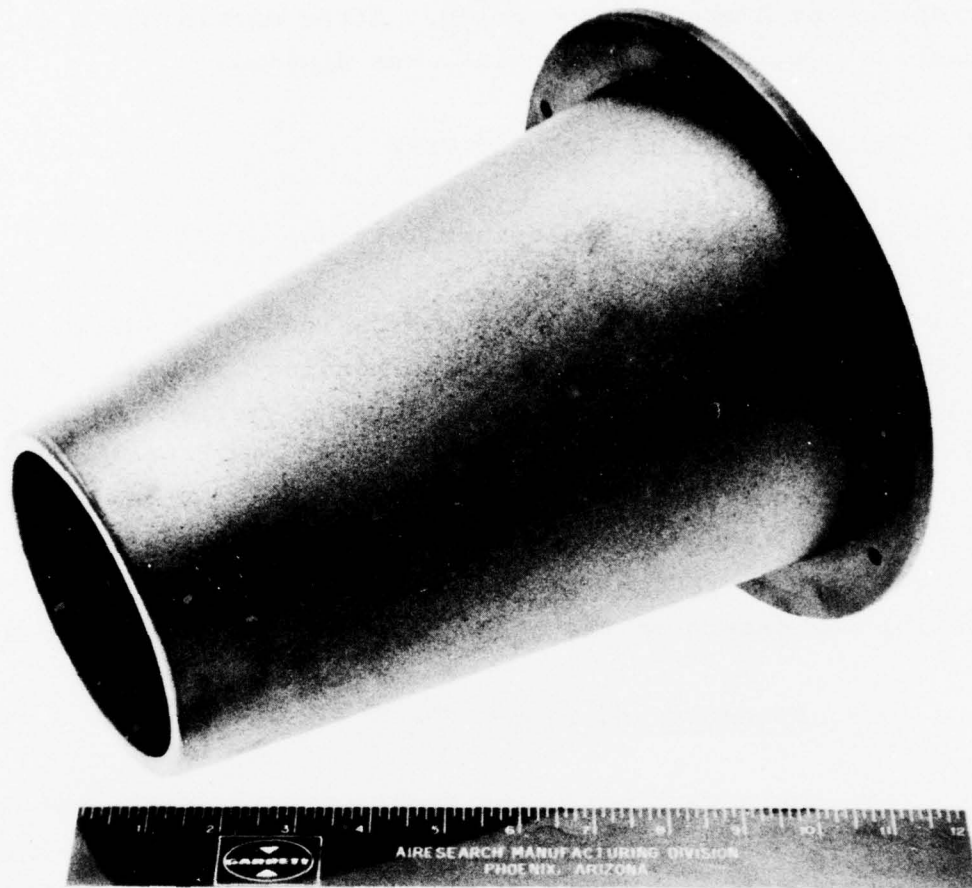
ETJ131, Model 1030 Thrust Nozzle.
